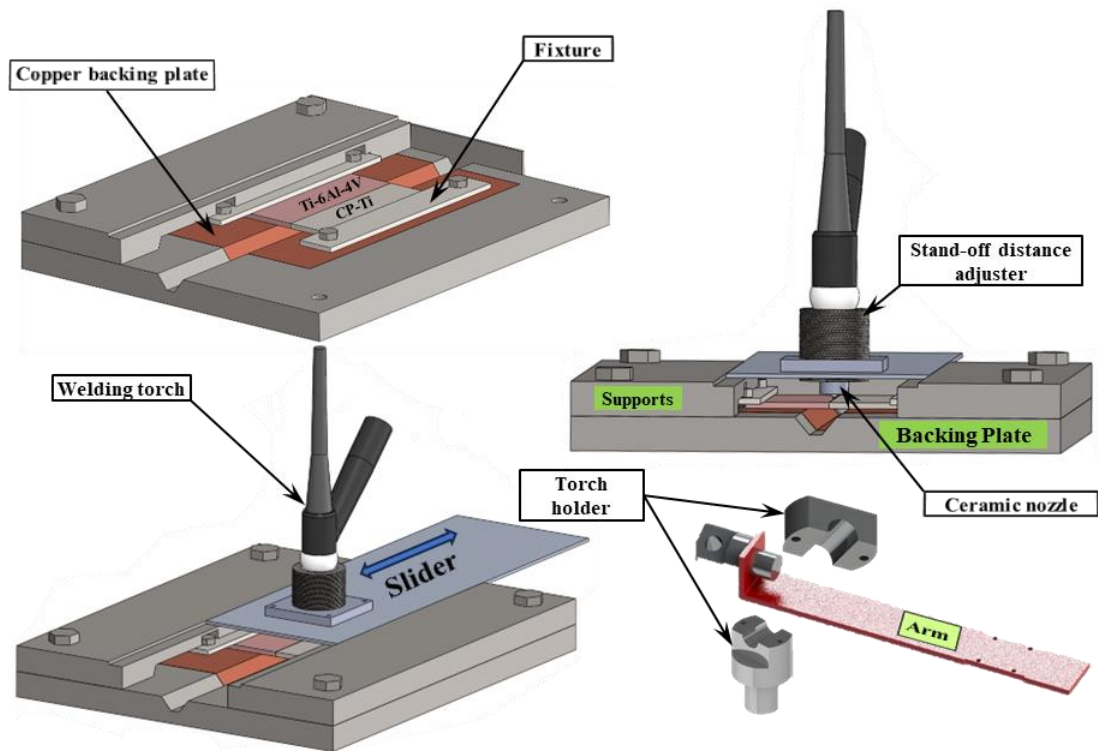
Three-dimensional schematic of developed shielding set-up
